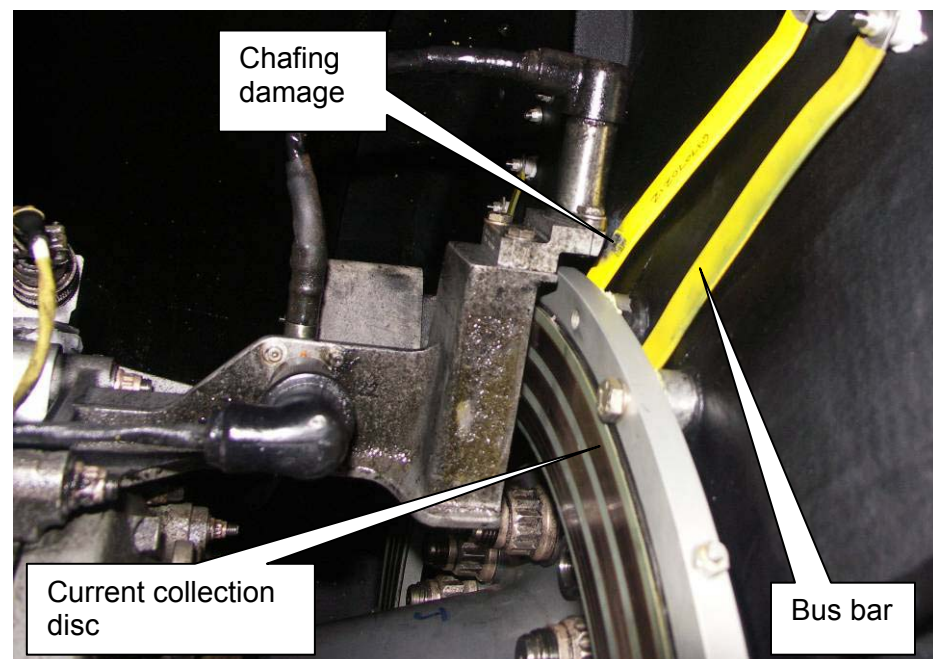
Chafing damage to the bus bar after contact with the MPU securing fixture
